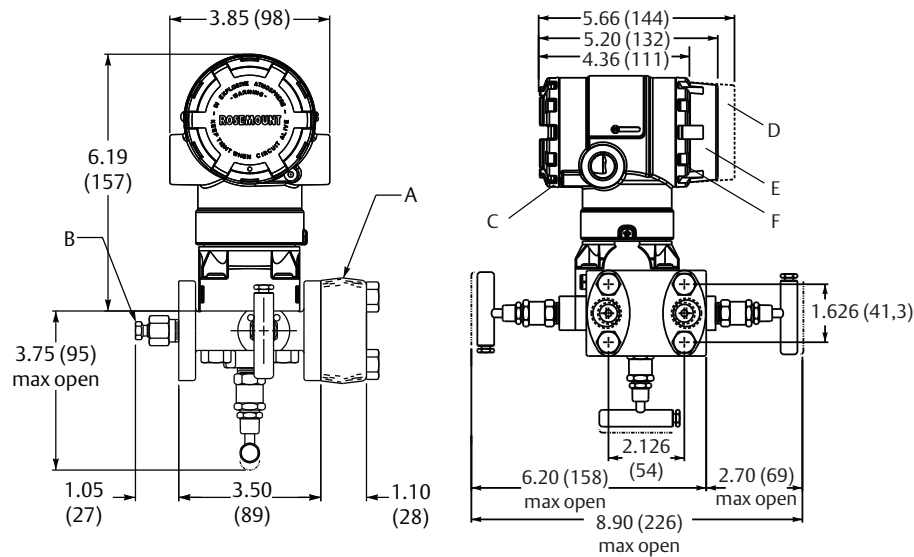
Rosemount 2051C Coplanar with Traditional Flange
